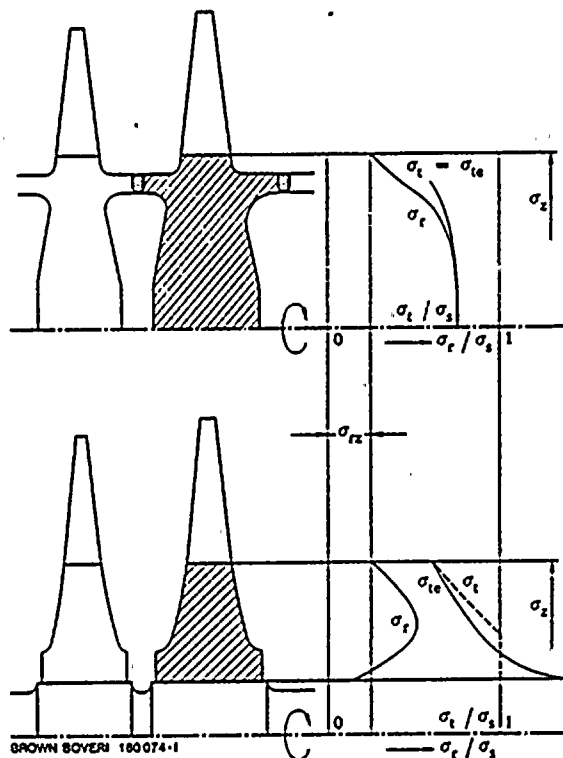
Comparison between a welded rotor design and a shaft with shrunk-on discs
